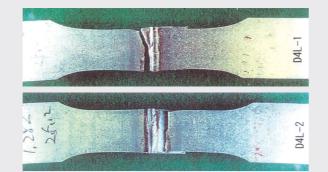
Fracture Conditions in Tension Tests for Lap Fillet Weld Joints (thickness: 1.2 mm)
